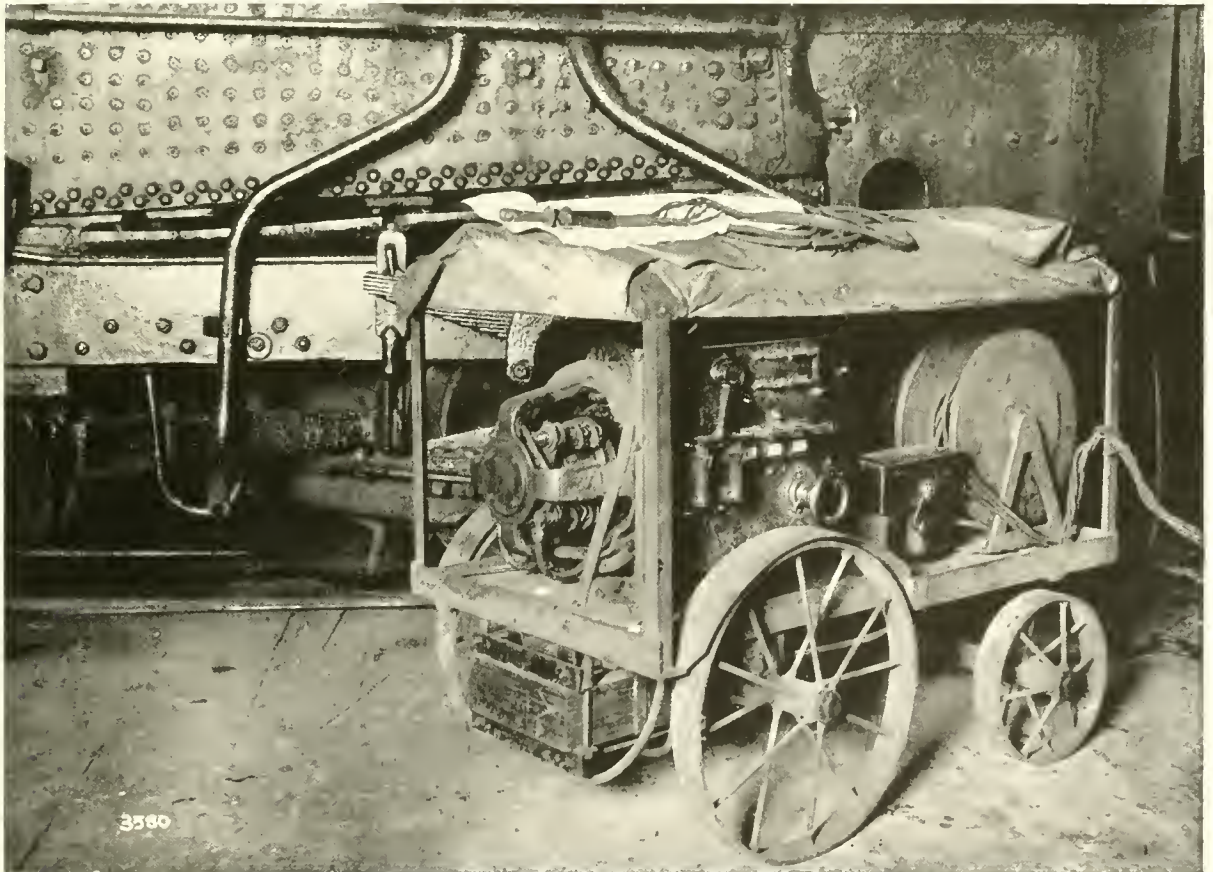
200 Ampere Lincoln Arc Welder on welded truck for engine house service.
